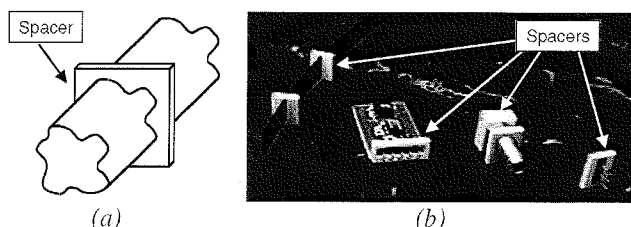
(a) Example of using additional parts, or spacers, for fixturing of irregularly shaped components. The figure in (b) shows a leaf spring, circuit board, tubing fitting and electrical connectors with their spacers. These spacers were manufactured in a separate production run using the same design and manufacturing interface.
